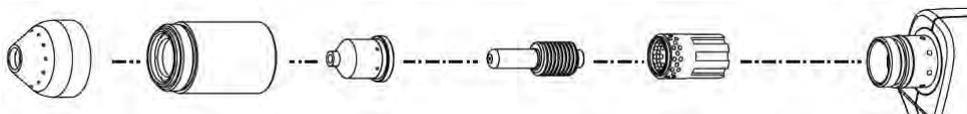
Scheme of installation of consumables for gouging. From left to right: nozzle protection, retention nozzle, nozzle, electrode, gas distributor and nozzle coupling torch
